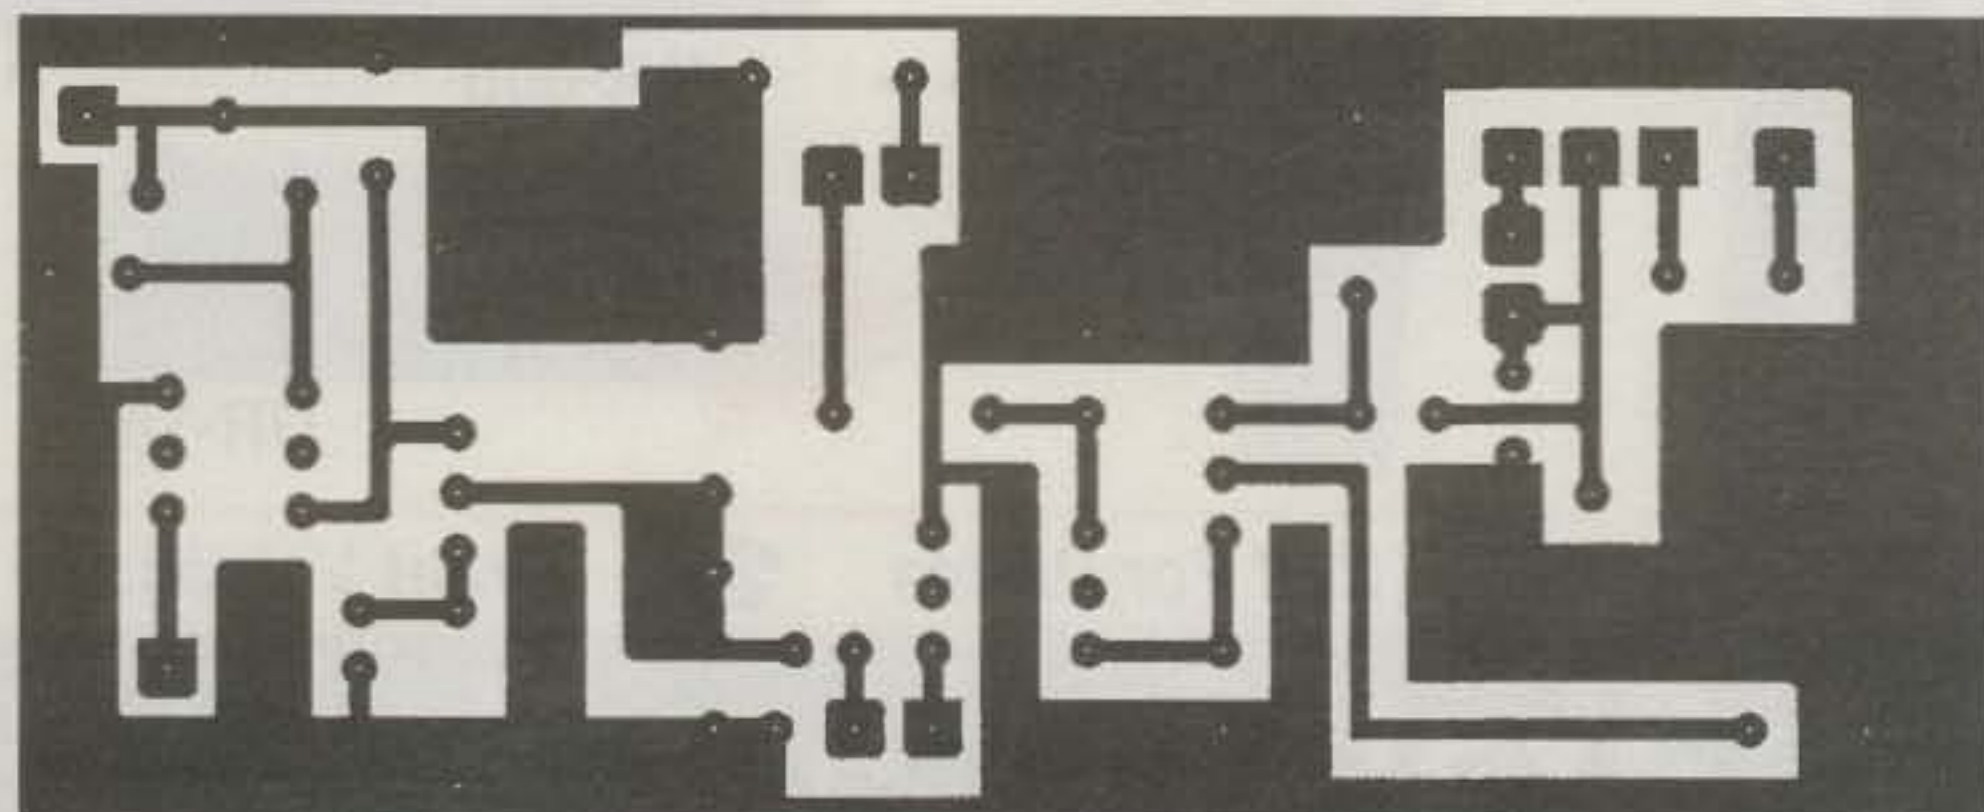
An example of a receiver PC board pattern created with PCBoards on a Panasonic laser printer at W1FB.
